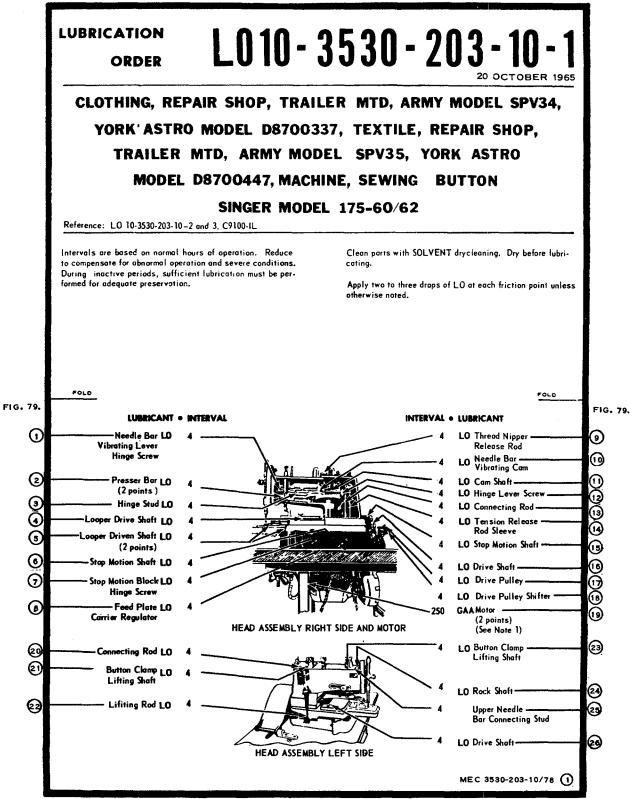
Lubrication Order 10-3530-203-10-1 for button sewing machine.
